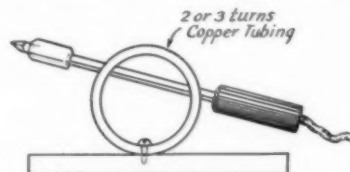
A SOLDERING-IRON HOLDER MADE FROM SCRAP COPPER TUBING
